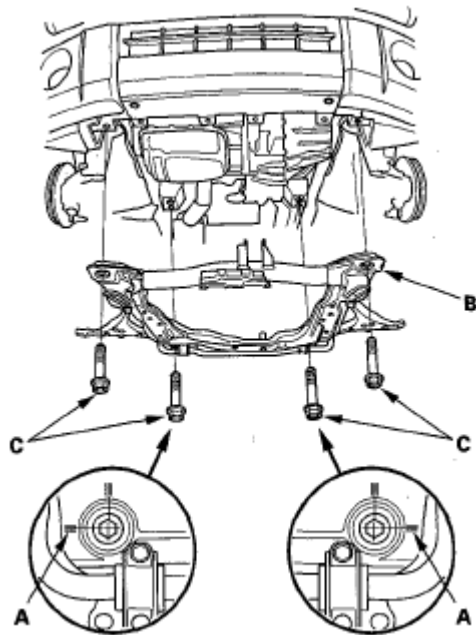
Identifying Reference Marks On Front Subframe And Mounting Bolts
